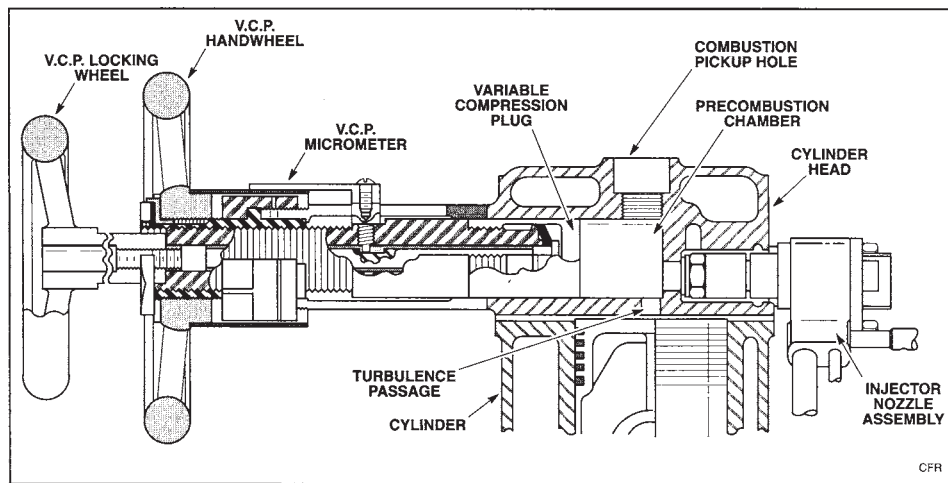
Cylinder Head and Handwheel Assembly—Sectional View
